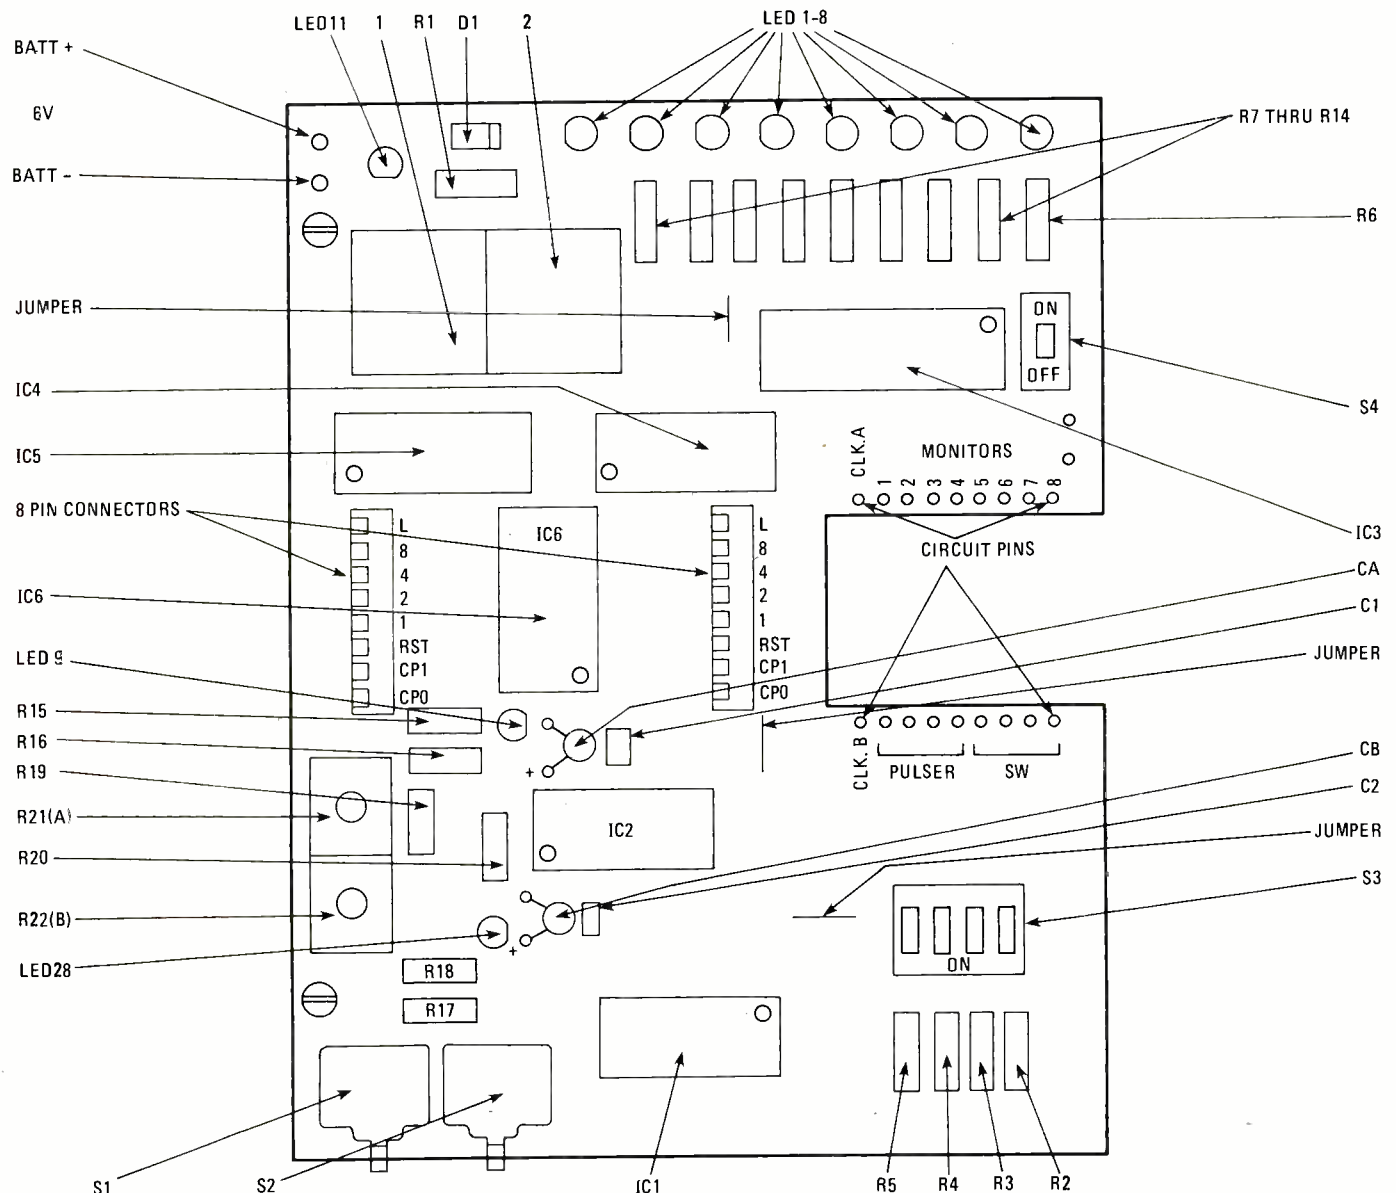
HERE'S THE UNIVERSAL DESIGNER OUTLINE with all the circuit parts installed on the circuit board. To see how the Universal Designer mounts on a solderless breadboard, refer to the photograph on the first page of this article.
